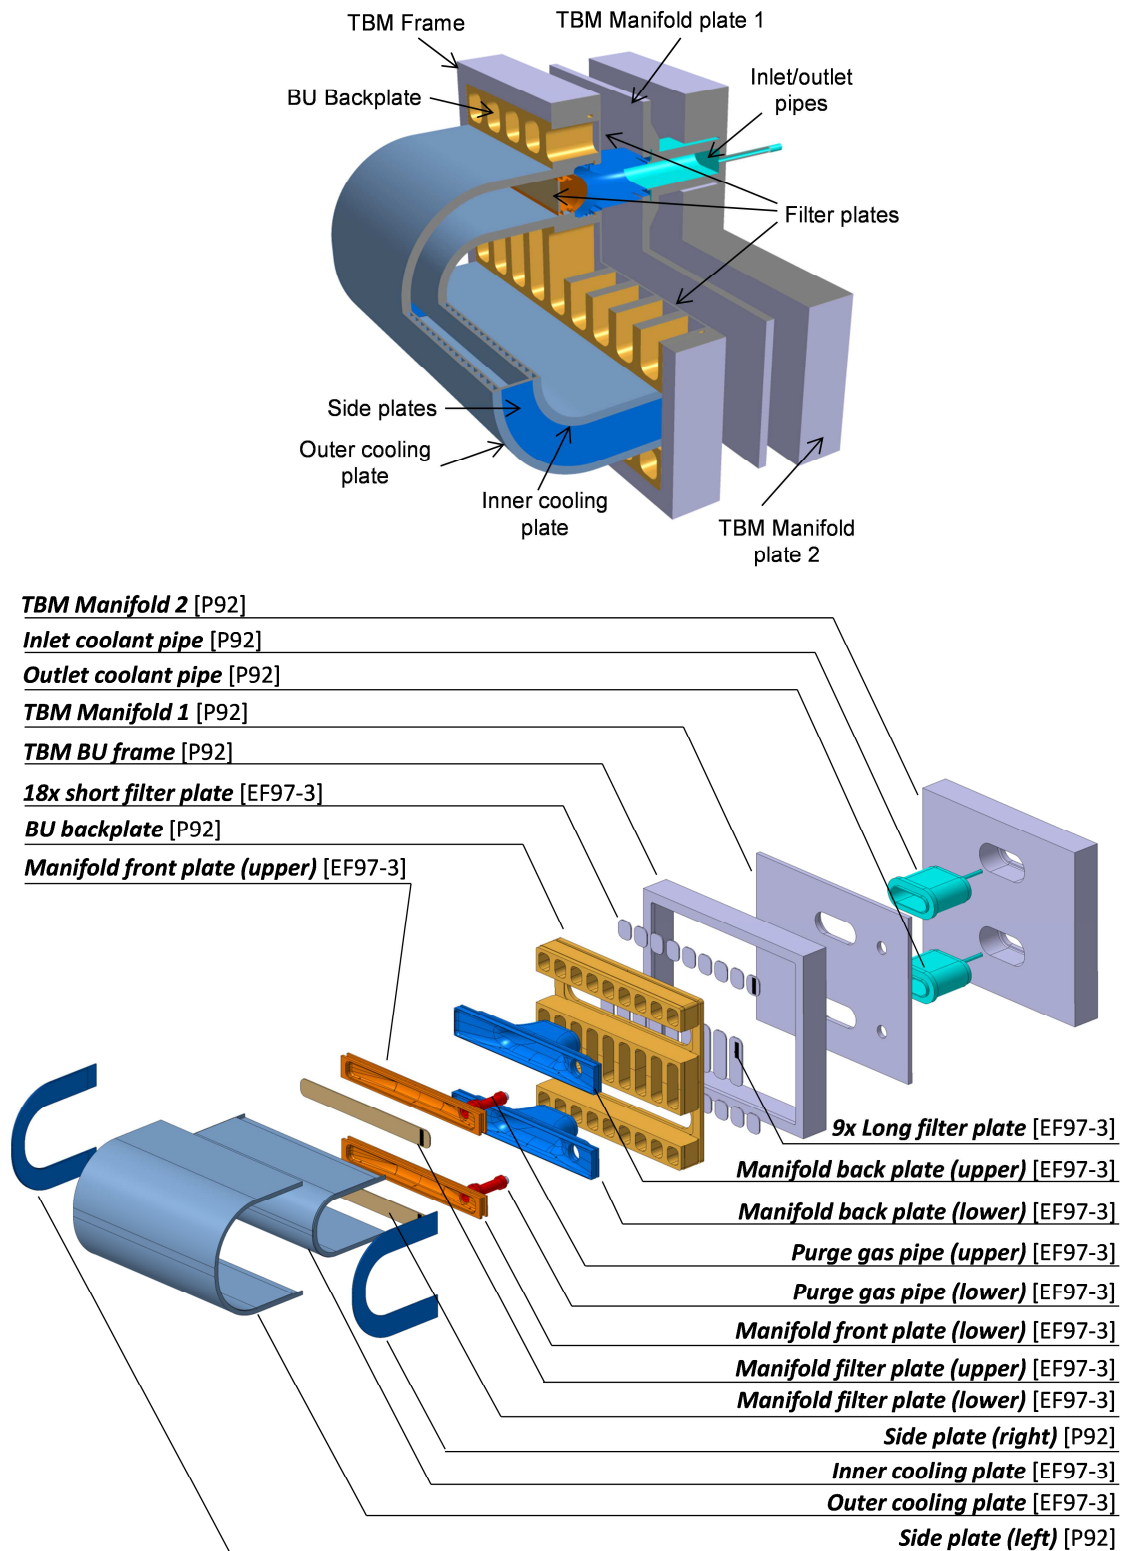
The Short Breeder Unit mock-up “SHOBU” (Hernández et al., 2014). Top: CAD picture with a 3D cut-off of a quarter of the mock-up. Bottom: Exploded view of the SHOBU assembly.
